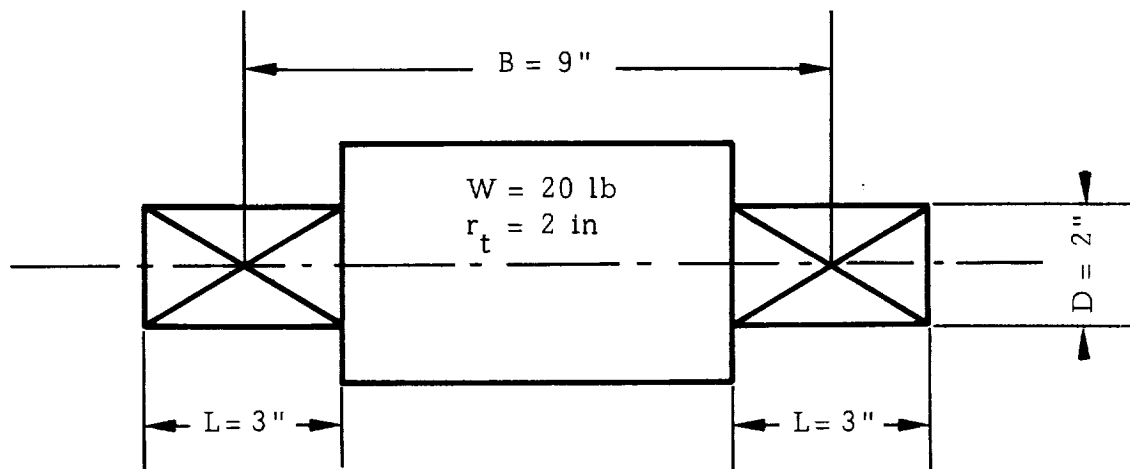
Schematic Diagram of Rotor Supported in Two Foil Bearings
